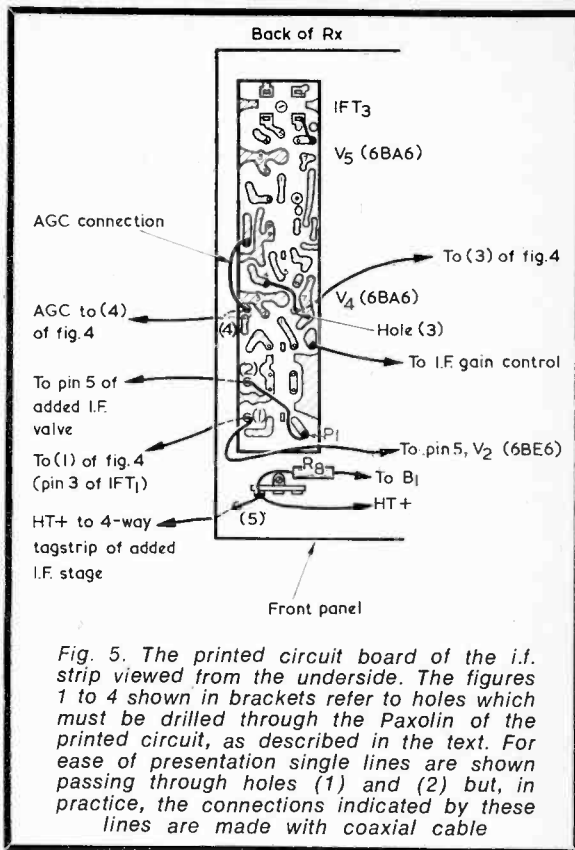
The printed circuit board of the i.f. strip viewed from the underside. The figures 1 to 4 shown in brackets refer to holes which must be drilled through the Paxolin of the printed circuit, as described in the text. For ease of presentation single lines are shown passing through holes (1) and (2) but, in practice, the connections indicated by these lines are made with coaxial cable
